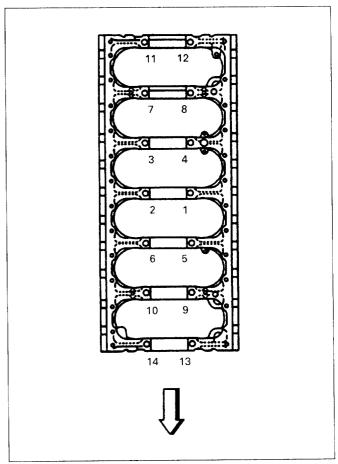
Lower Crankcase Bolt Tightening Sequence
